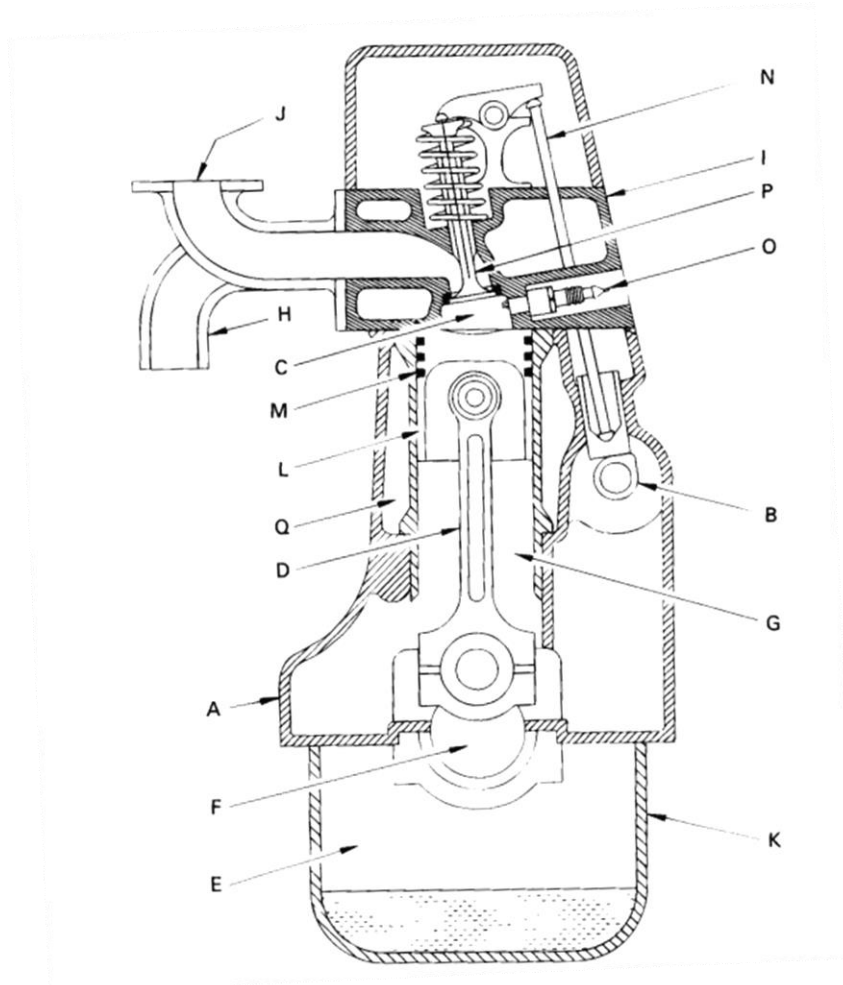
Cross-section of four stroke cycle SI engine showing engine components –(A) Block; (B) Camshaft; (C) Combustion chamber; (D) Connecting Rod; (E) Crankcase; (F) Crankshaft; (G) Cylinder; (H) Exhaust manifold; (I) Head; (J) Intake Manifold; (K) Oil Pan; (L) Piston; (M) Piston Rings; (N) Push Rod; (O) Spark Plug; (P) Valve; (Q) Water jacket. Figure adapted from Pulkrabek (1997).
